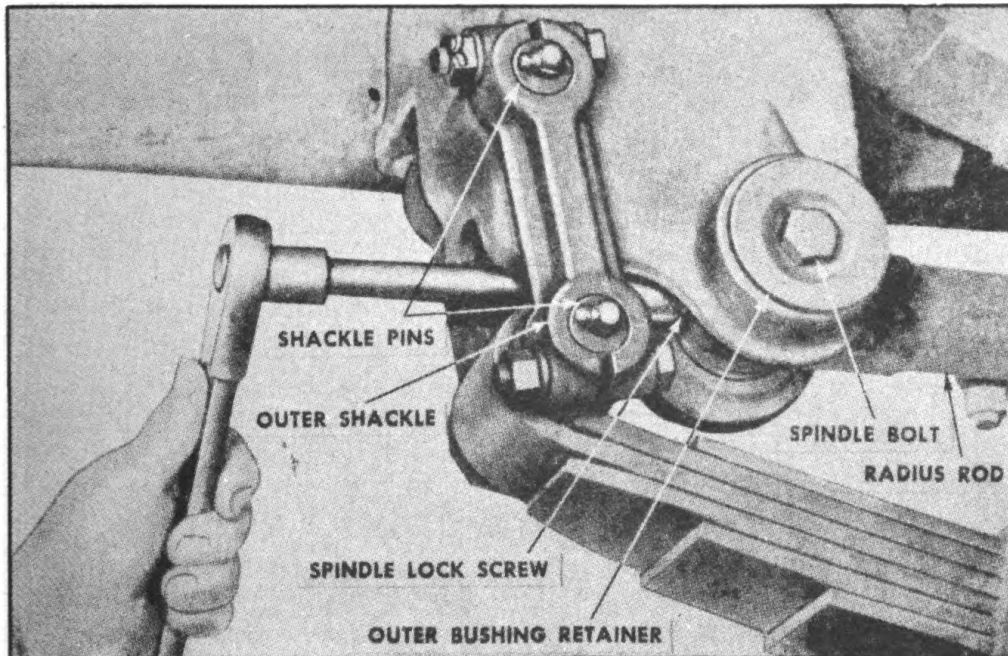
REMOVING SPINDLE LOCK SCREW
